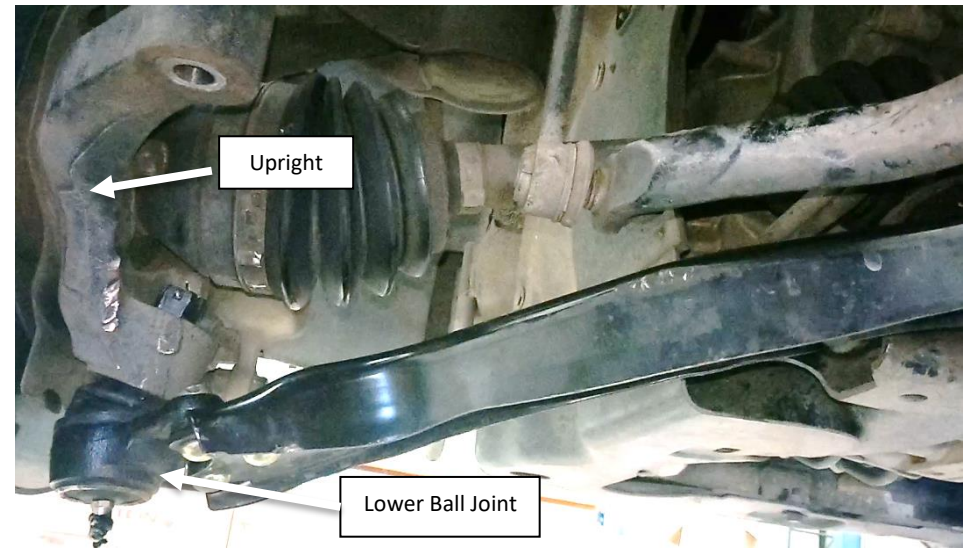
View from underneath of the vehicle - Left Hand Side Control Arm assembly installed
